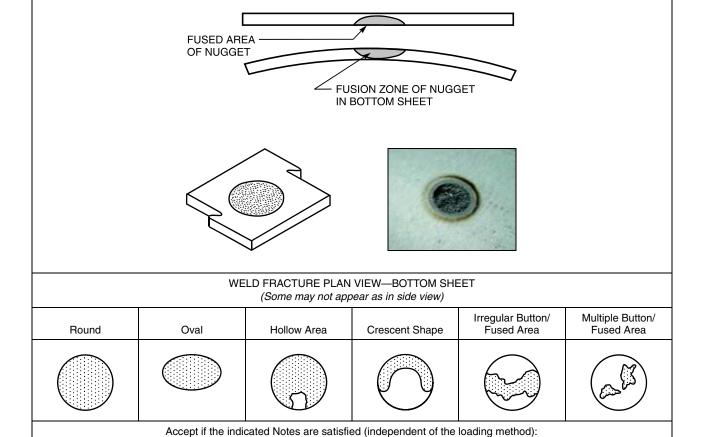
Fracture Mode 5—Interfacial Fracture with Button Pull
